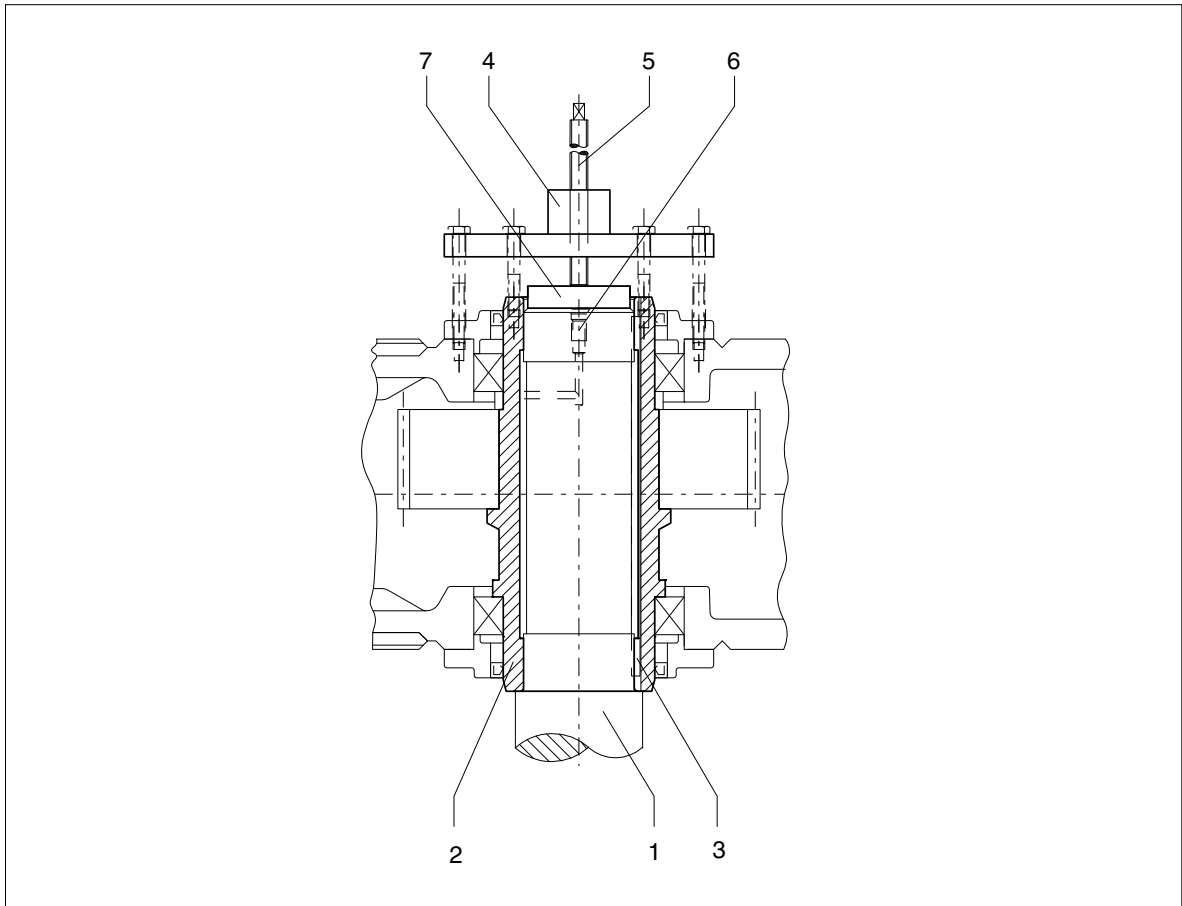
Hollow shaft with parallel keyway, demounting with hydraulic lifting unit
